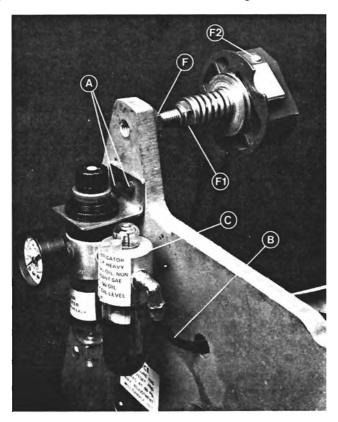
INSTALLATION - AIR CONTROL - LEFT SIDE VIEW
